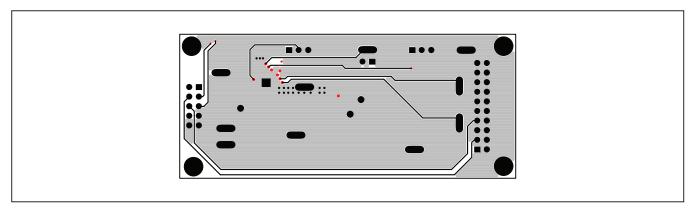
MAX20010 EV Kit PCB Layout—Layer 2
